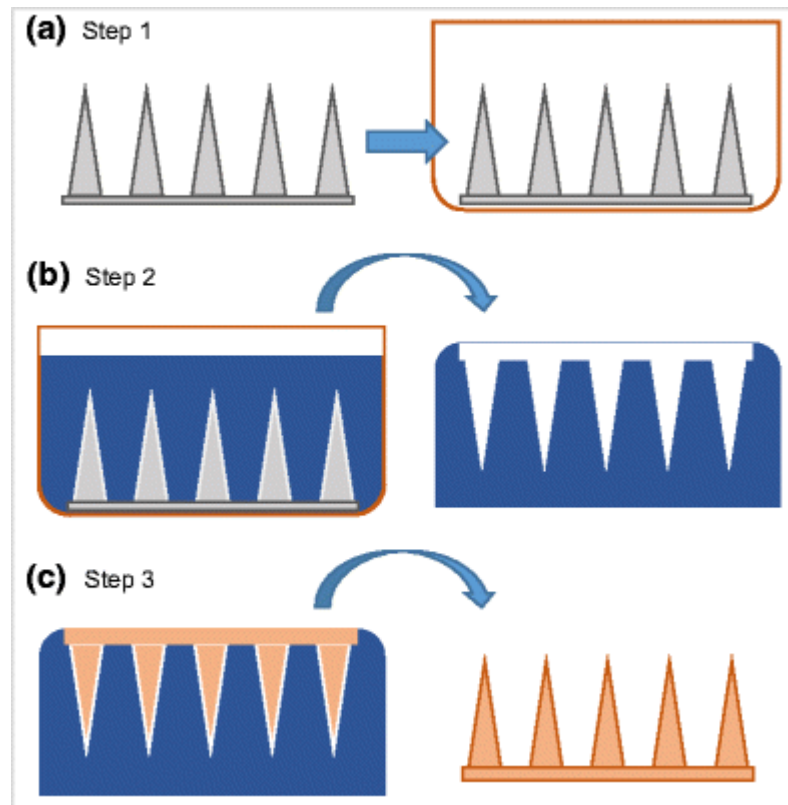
Schematic representation of micro moulding techniques: (a) step 1, a master mold is fabricated from a strong material, such as metal or silicon, and prepared for use as a master mold; (b) step 2, a negative mold is made from the master mold which is usually PDMS; (c) step 3, drug is loaded into the negative mold usually through a polymer solution that creates the final MN structure of the same shape and dimensions as the master mold (83).
